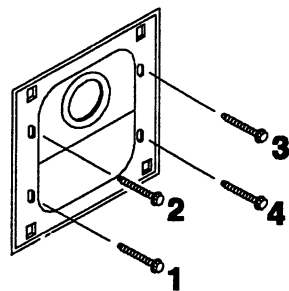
Screw the self-tapping screws through holes in rear panel of SP2500LP Speaker assembly
